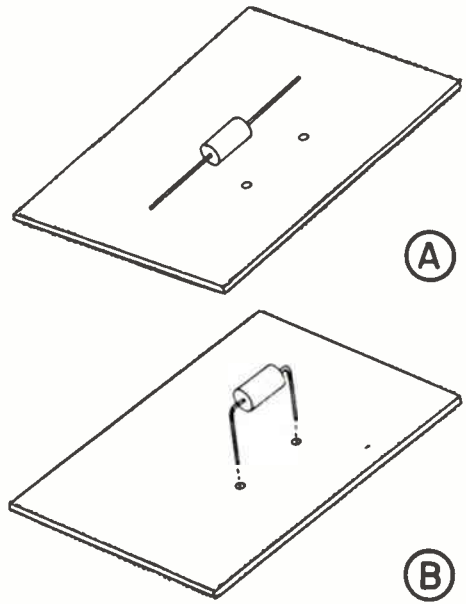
(A) Measuring the resistor against the mounting holes; (B) resistor leads bent to correct spacing.
